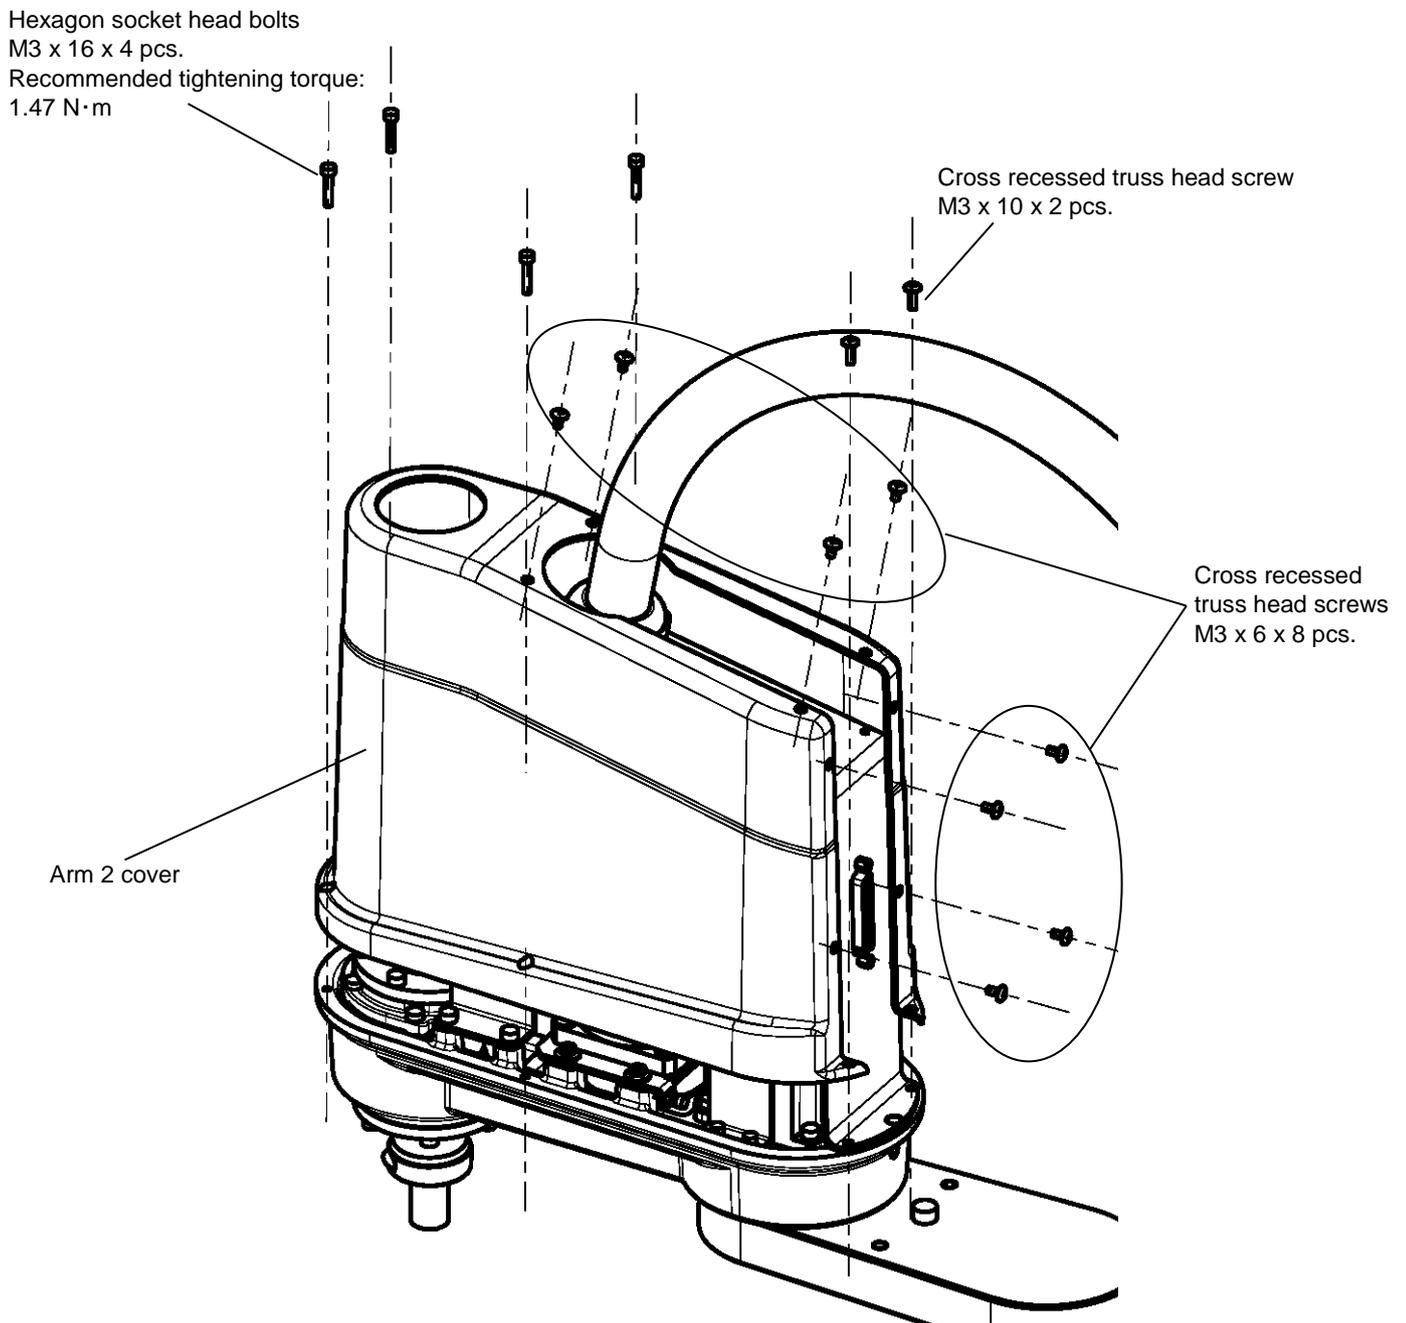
Removing the Arm 2 Cover (KHL-300 and KHL-400)
